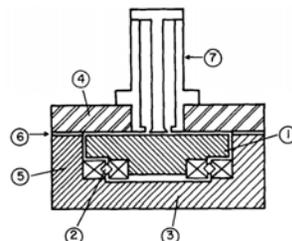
Cross section of the sliding plate rheometer, showing the moving plate [1], linear bearing [2], back plate, [3], stationary plate [4], side supports [5], and shims [6]. (Details, e.g. such as assembly bolts, etc. not shown.)
